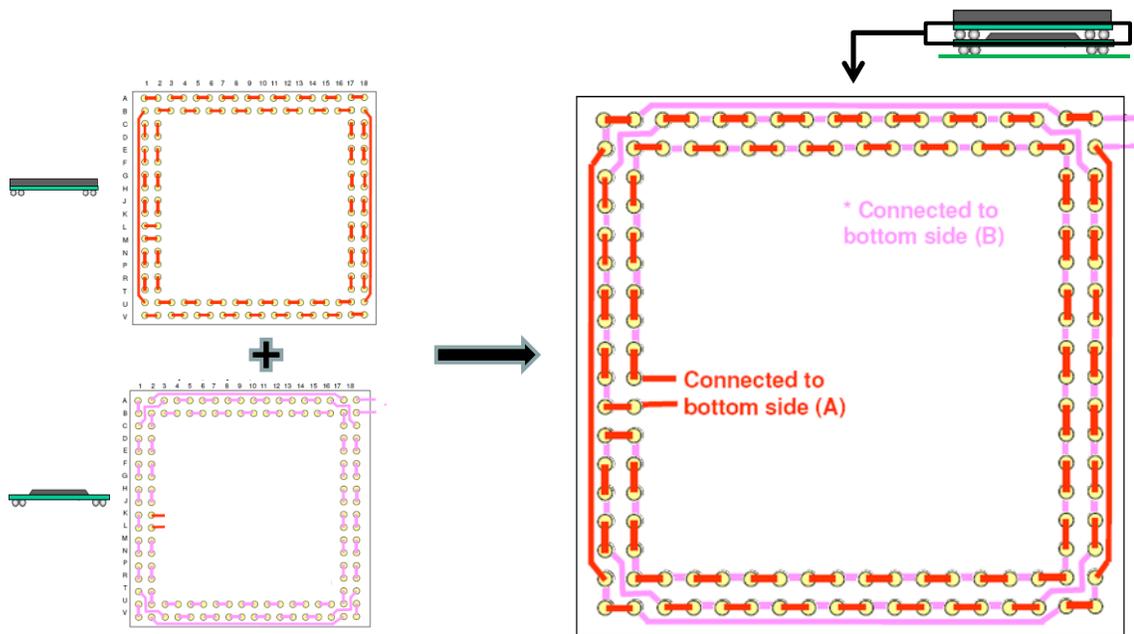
Schematic showing matching daisy chain net-lists on the top of the bottom package (PSvfBGA) and the bottom of top package (CSP)
